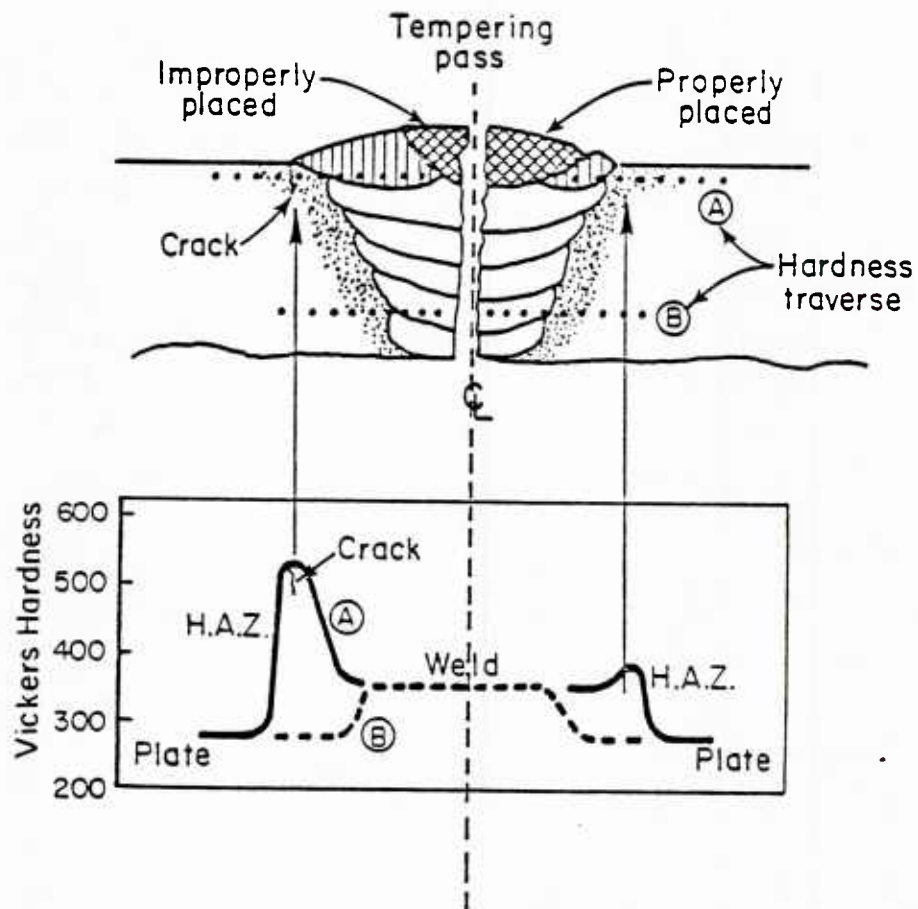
SCHEMATIC OF THE STRUCTURE OF A BUTT WELD AFTER PELLINI AND PUZAK(35)
